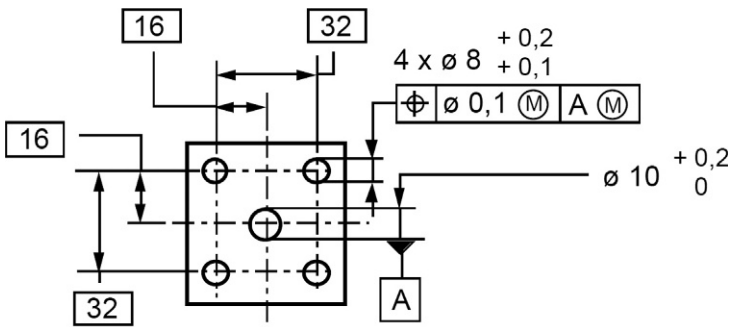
Example of drawing indications, position tolerancing with datum
